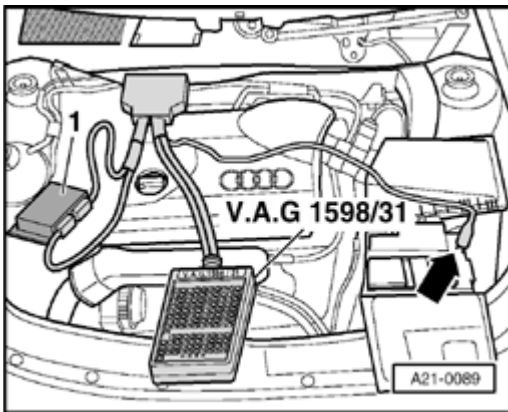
Connecting Test Box V.A.G 1598/31 To Wiring Harness For Engine Control Module
